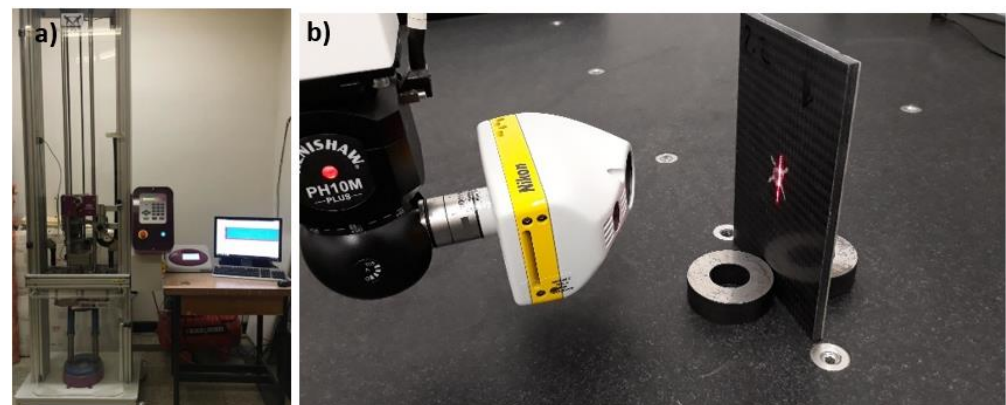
(a) INSTRON CEAST 9340 drop-tower impact testing machine; (b) Altera coordinate measuring machine equipped with LC15Dx CMM automatic laser scanner.
